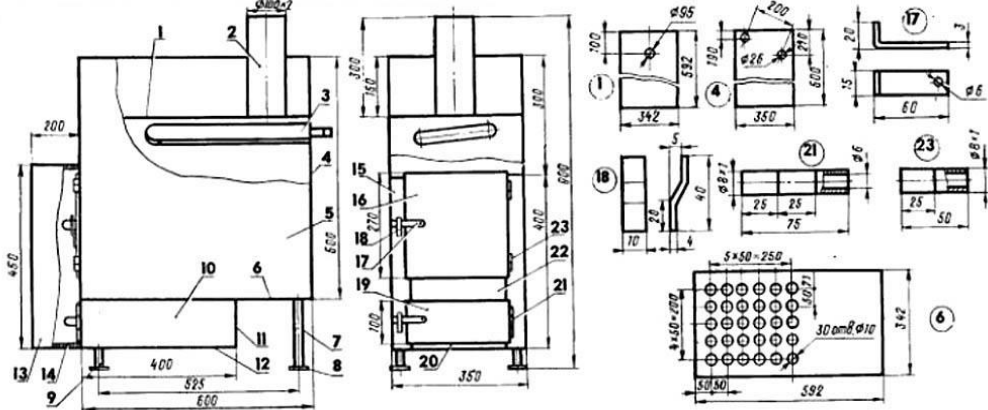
Household furnace design example: 1 – smoke pipe basement sheet with an orifice, 2 – smoke pipe, 3 – heat exchanger; 4 – aft sheet of metal with heat exchanger connection points, 5 – side wall sheet; 6 – furnace basement sheet, 7 – strut, 8 – strut base, 9 – strut, 10 – ash box wall, 11 – ash box aft wall; 12 – ash box basement sheet, 13 – thermal screen wall, 14 – thermal screen basement, 15 – front wall side sheets, 16 – combustion chamber door, 17 – door lock, 18 – clamp, 19 – ash box door, 20 – front wall lower part, 21 – door hinge hub, 22 – front wall middle part, 23 – hub
